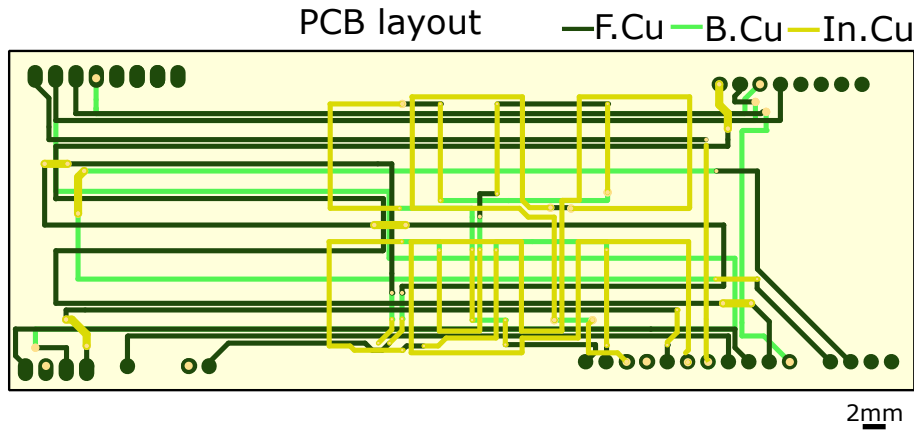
PCB layout of our customized local shim structure (X,Y,Z,Z1,Z2,Z3,Z4). PCB is a three-layered metal flexible PCB. (F.Cu: front copper layer, B.Cu: bottom copper layer, In.Cu: intermediate copper layer)
